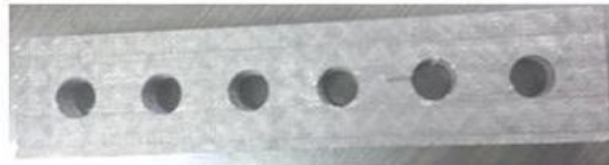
CFRP plate with pre-drilled hole using AWJM.
